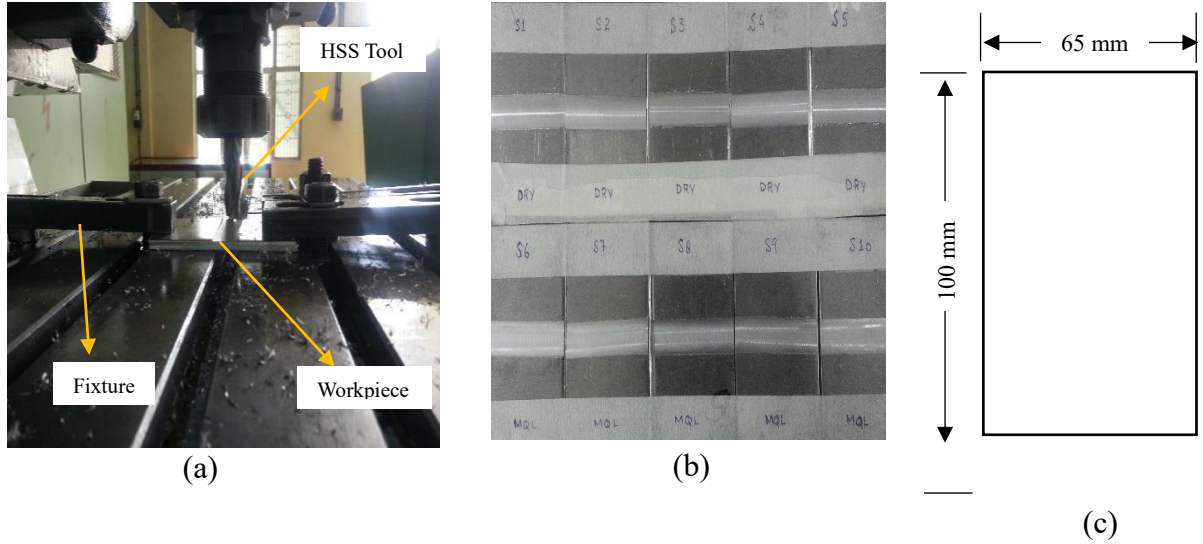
(a) Face milling process of aluminum specimen (b) machined specimens and (c) dimensions of specimen prepared for machining
